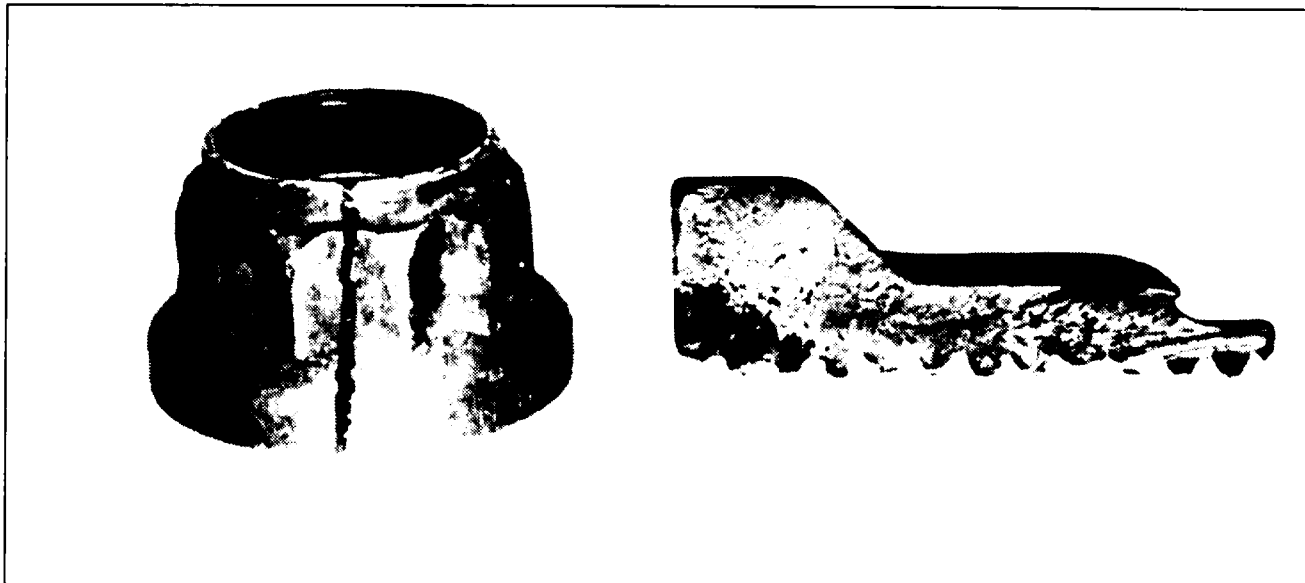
13. EXAMPLE OF CRACKED NUT DUE TO CORROSION
